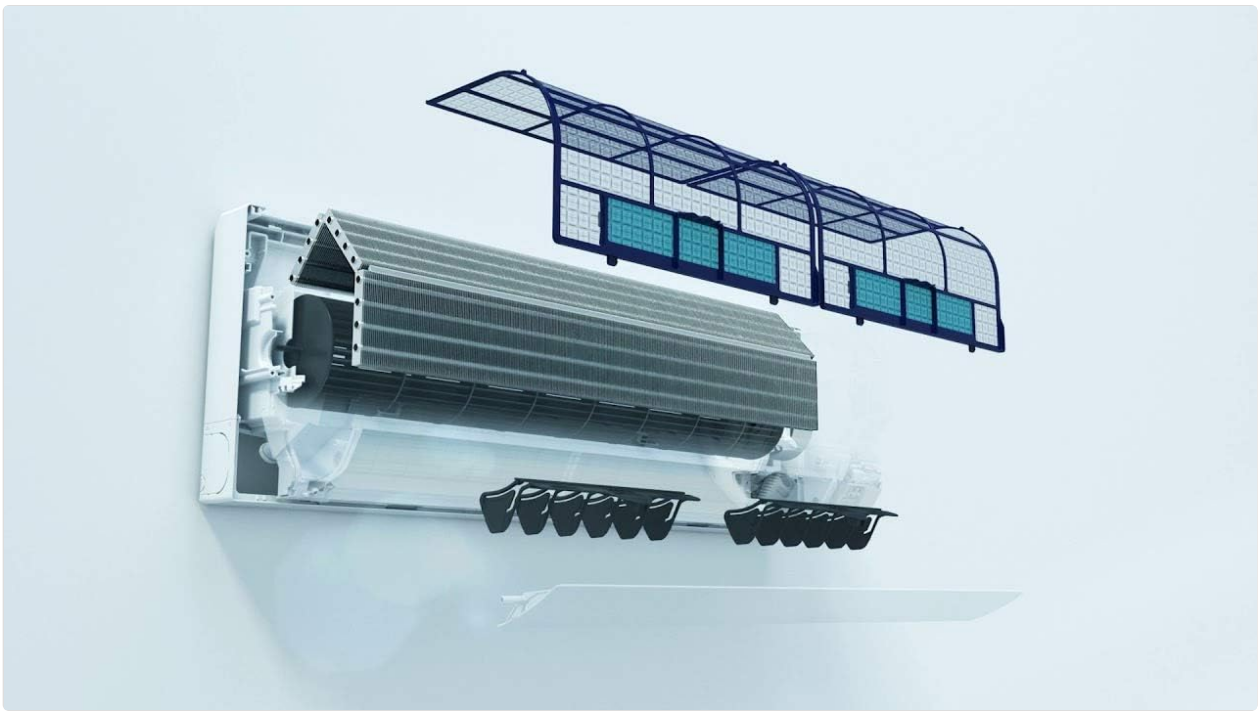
Exploded view of the indoor unit, illustrating its internal structure and components.
